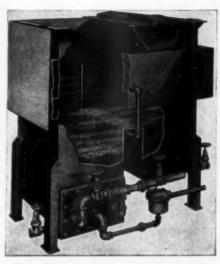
Cutaway view of steam heated two-dip degreaser, showing solvent and vapor levels during operation, water jacket condenser and distillate collecting trough.
